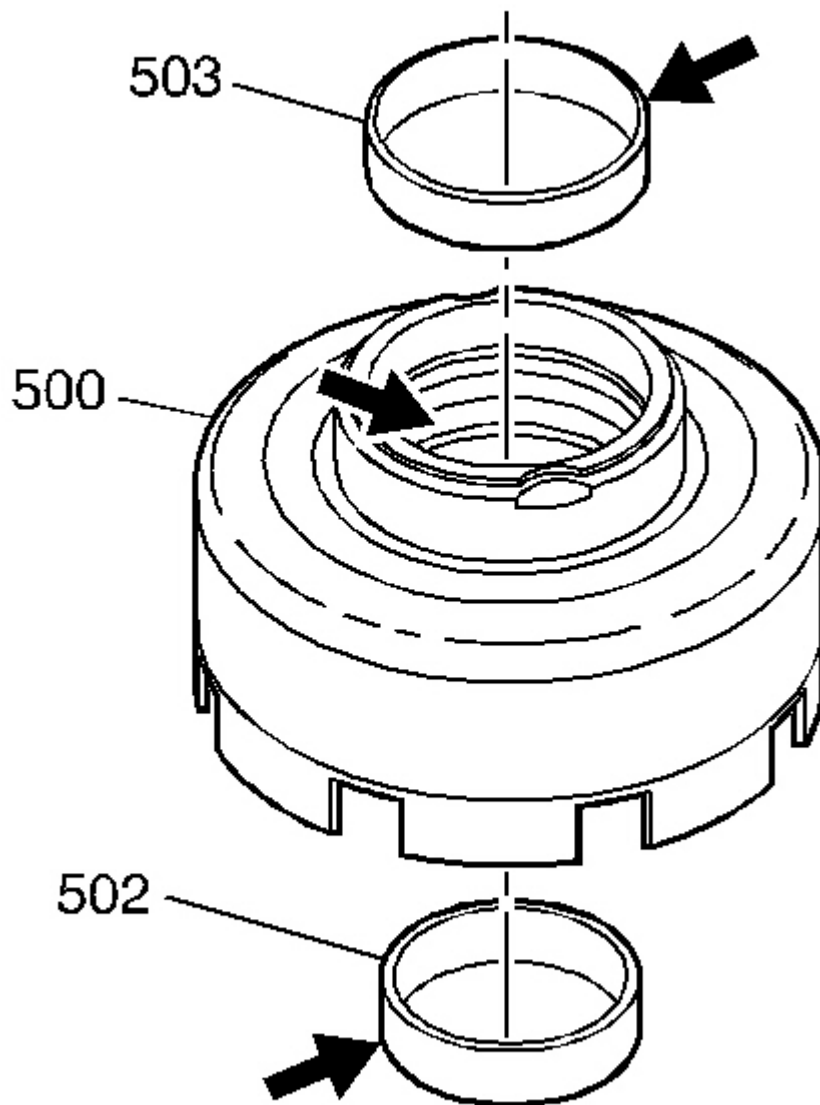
Inspecting Reverse Clutch Housing Bushings
